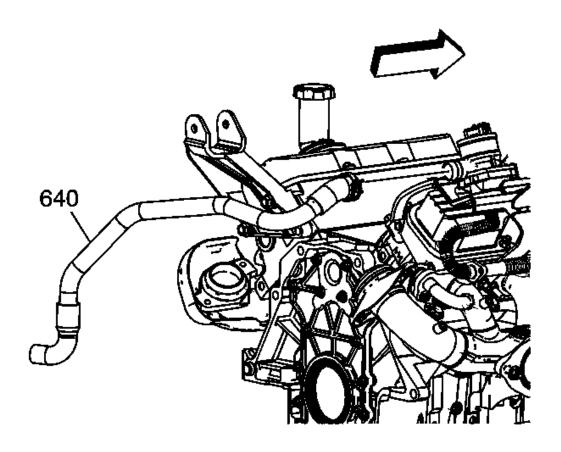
Secondary Air Injection Assembly Courtesy of GENERAL MOTORS CORP.
